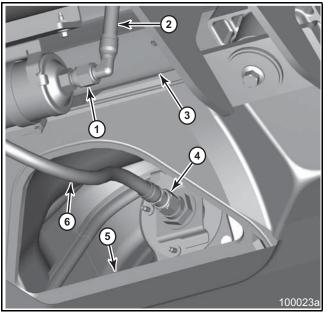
Fuel Fill Line at Fuel Fill Valve Fitting (Typical)
